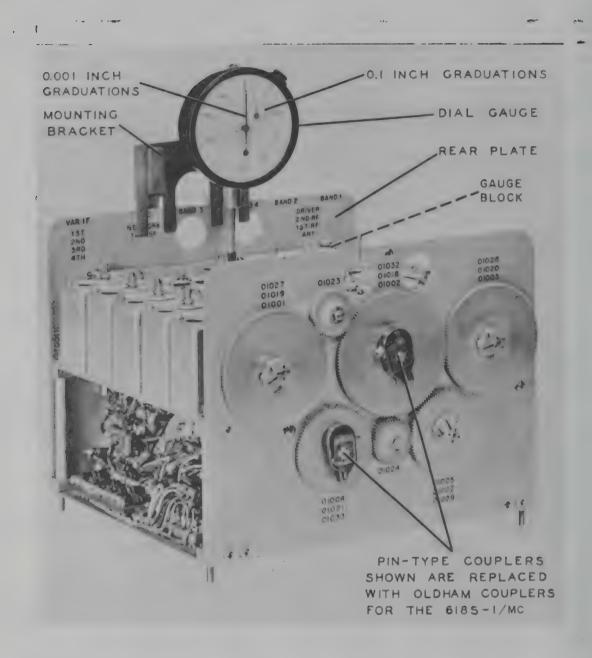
Tuner Subassembly, Dial Gauge in Place
